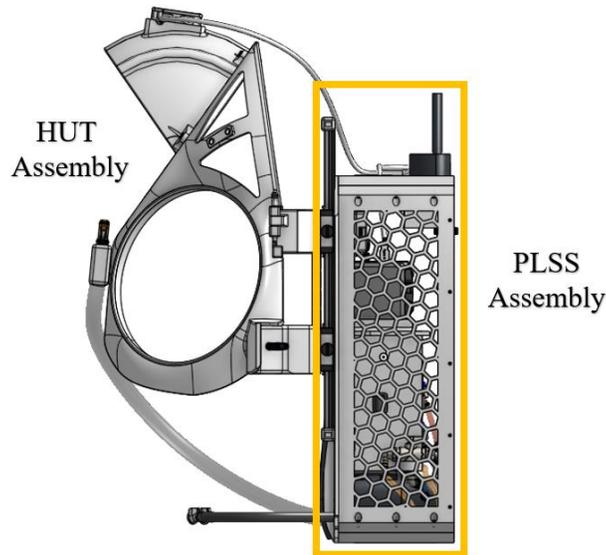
Side View of HS3 2.5 HUT and PLSS Assembly
